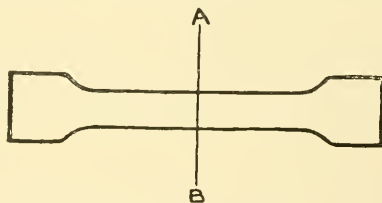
Test piece of wrought iron welded at A B. See Fig. 6 for micro-section.
